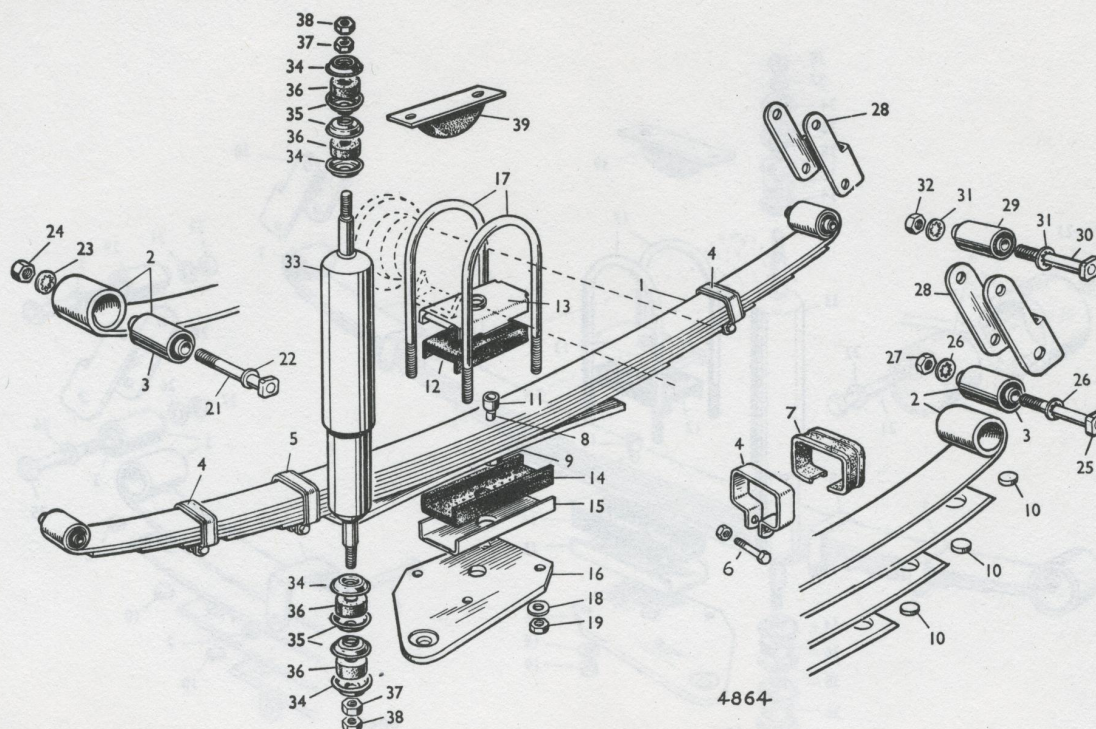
Exploded view of Rapier rear suspension (without eccentric bush)
